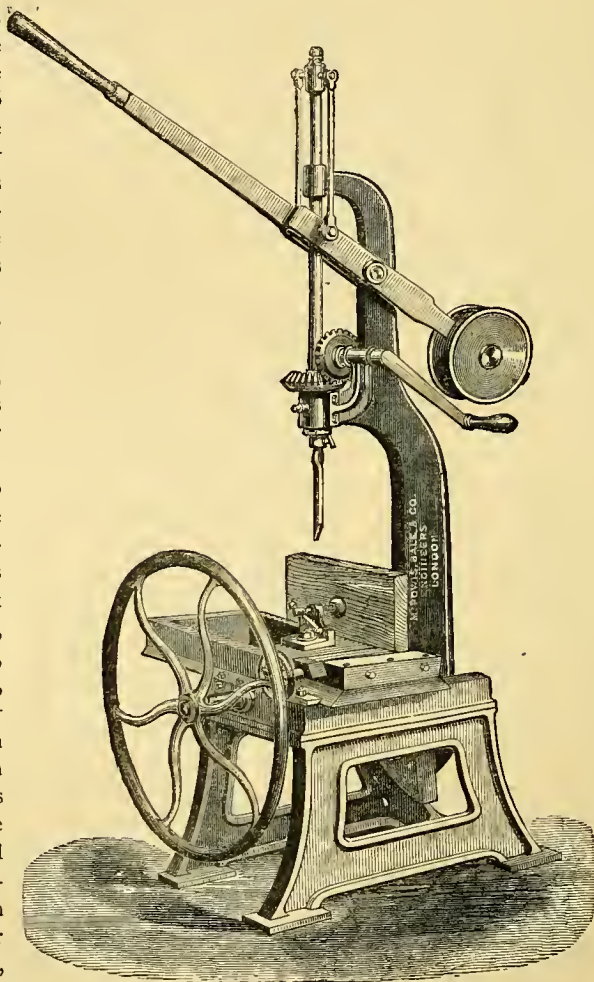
HAND-POWER MORTISING AND BORING MACHINE.
